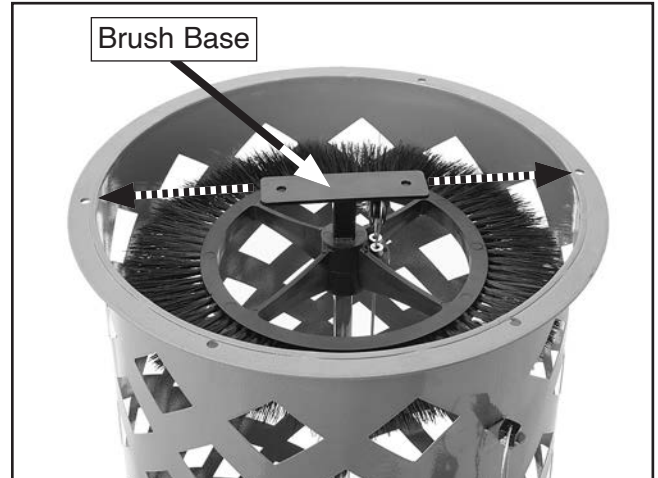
Example of filter brush base aligned with assembly fastener holes.
